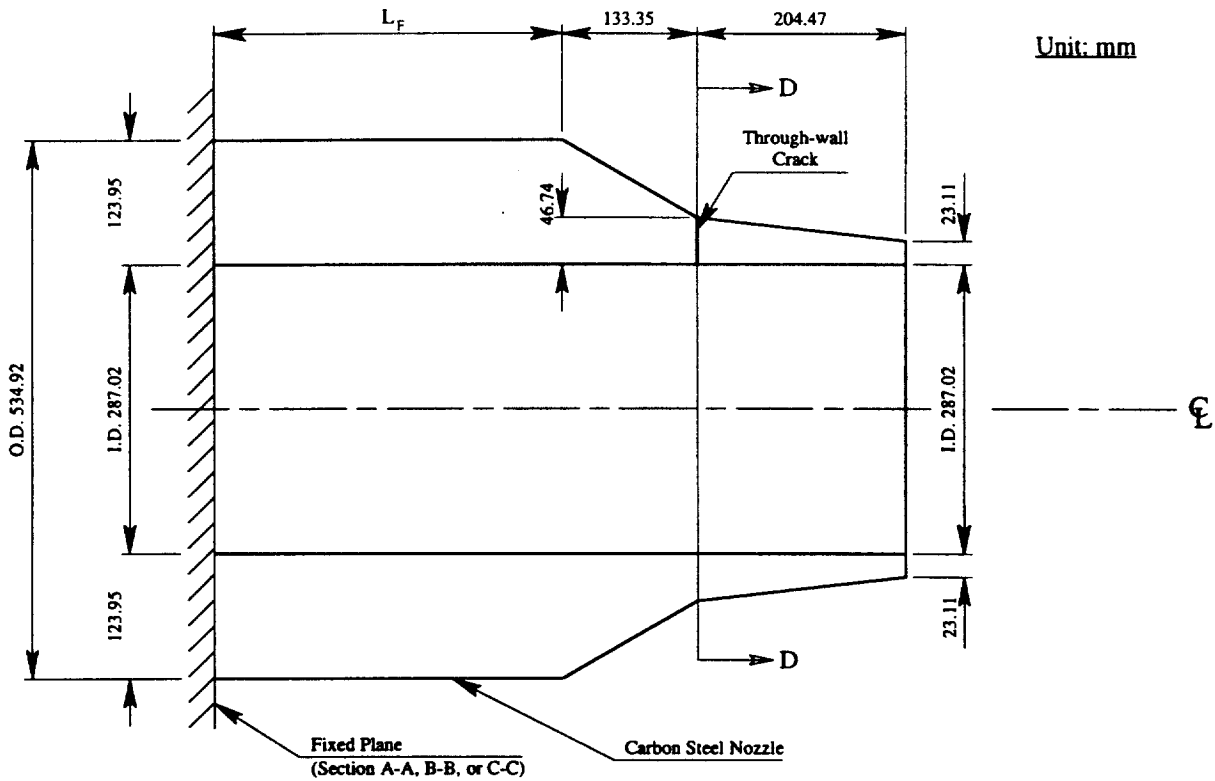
Geometric details of a carbon steel nozzle with a through-wall crack at thickness transition, dimensions in mm.
